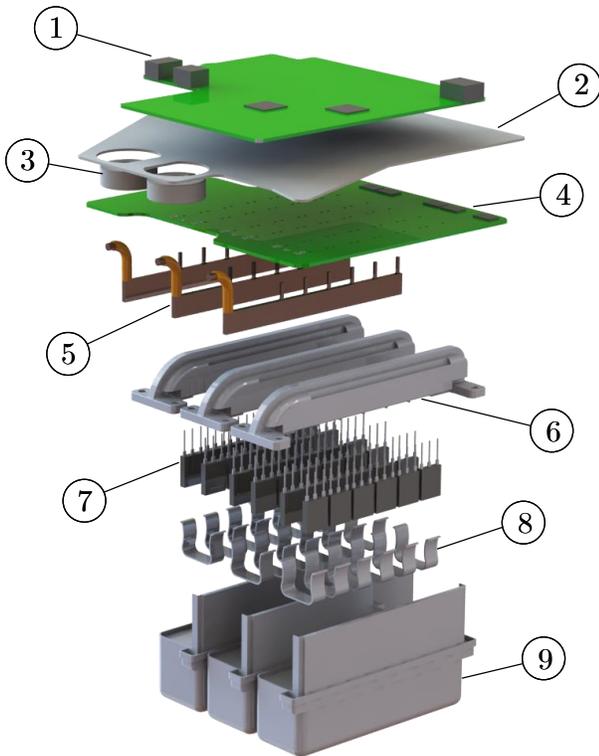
Tesla Model S inverter components 1) Control board 2) Aluminium shield 3) Phase current sensor ferrite ring 4) Gate driver board 5) Phase busbars 6) Heat sinks 7) TO-247 package IGBTs 8) IGBT clips 9) DC-link capacitors.
